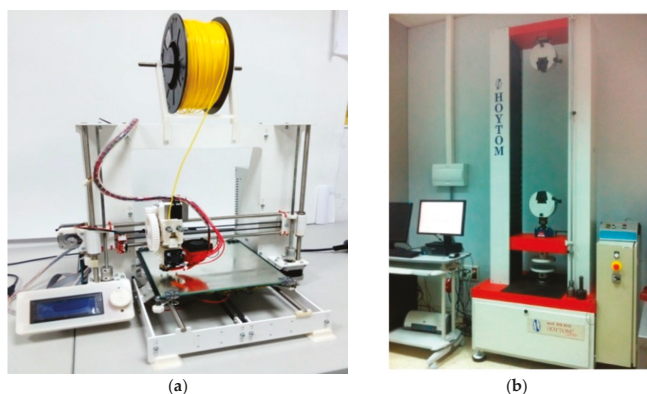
The equipment: (a) a Prusa i3 printer; (b) a HOYTOM HM-D 100kN Universal testing machine.
